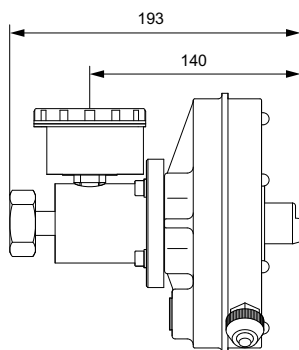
Vacuum regulator VGA-146 (mounting on header lines)
